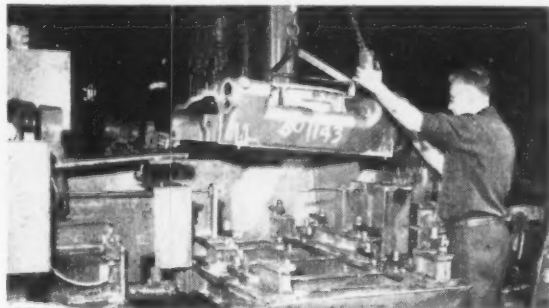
Loading a homemade machine that used two hydraulically fed drills to produce a 5/8-in. diam oil gallery hole 40 1/2 in. long. Both front and rear half housings are handled in this machine.
